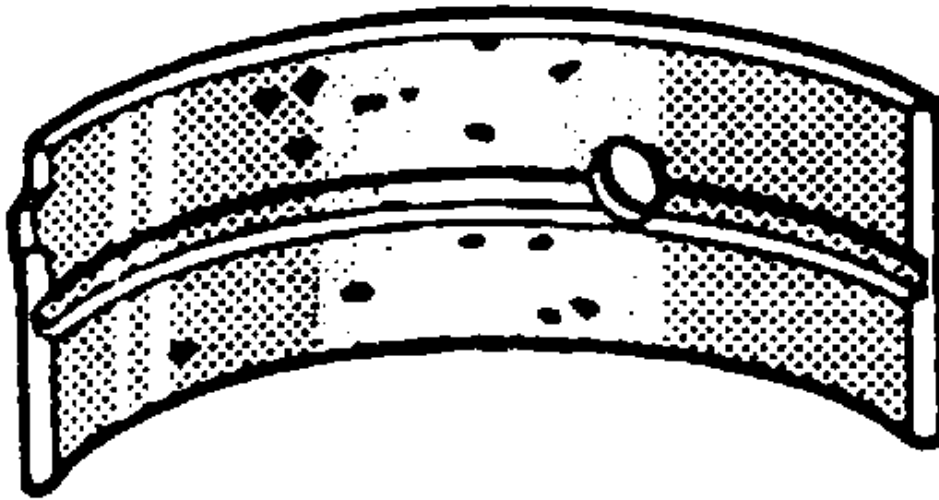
Identifying Crankshaft Bearing Craters Or Pockets
